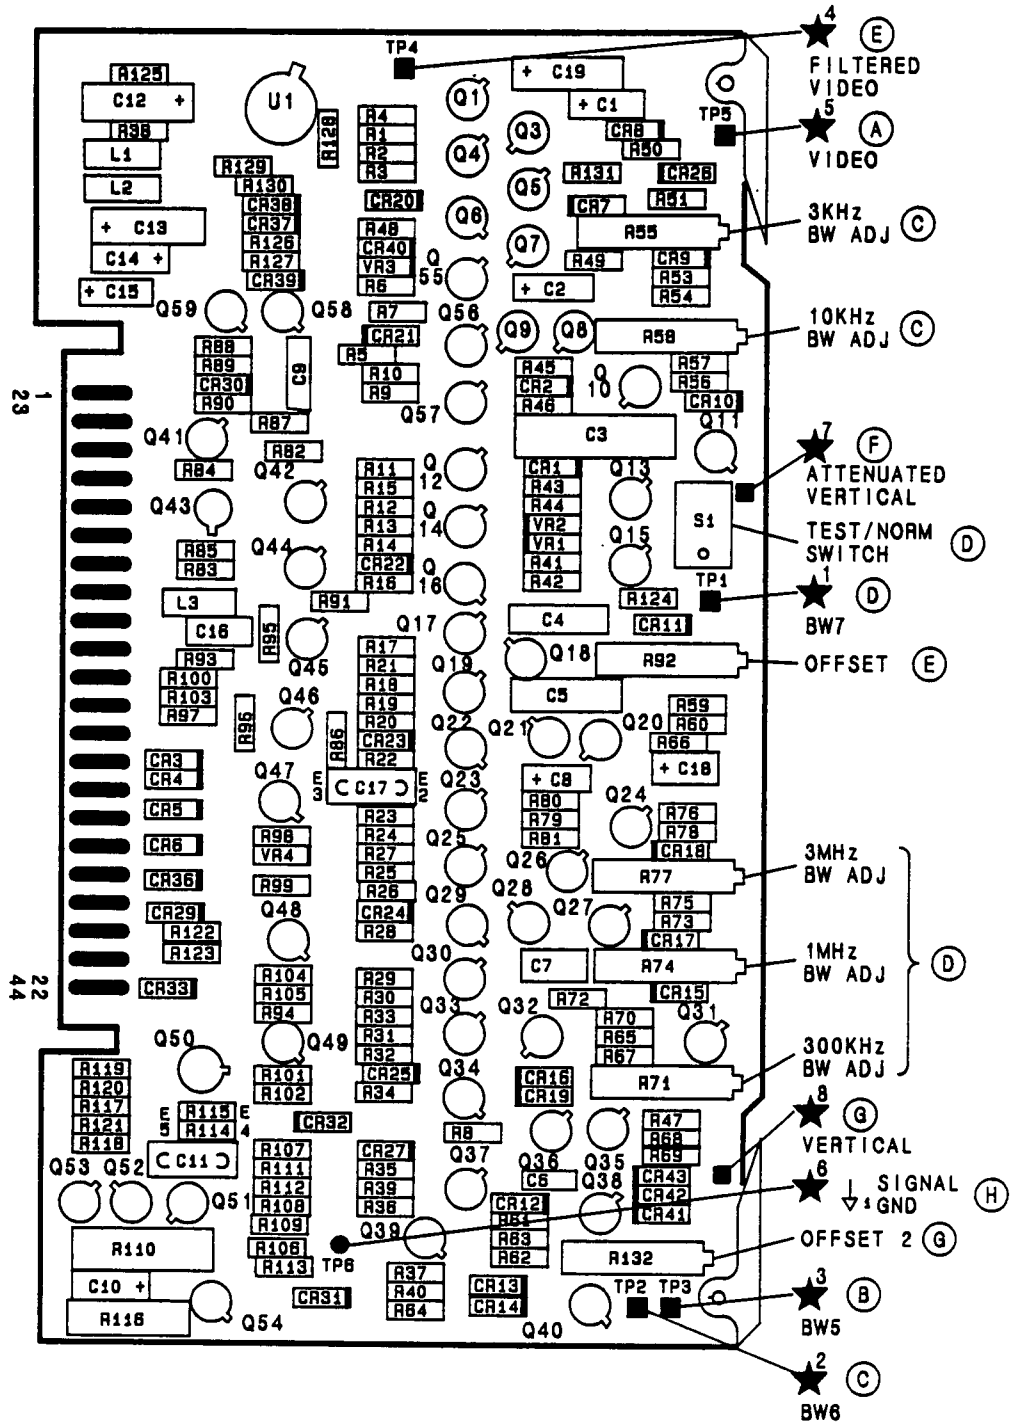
A21 VIDEO-100 Hz ASSEMBLY, COMPONENT LOCATIONS (SERIAL PREFIX 2538A)
